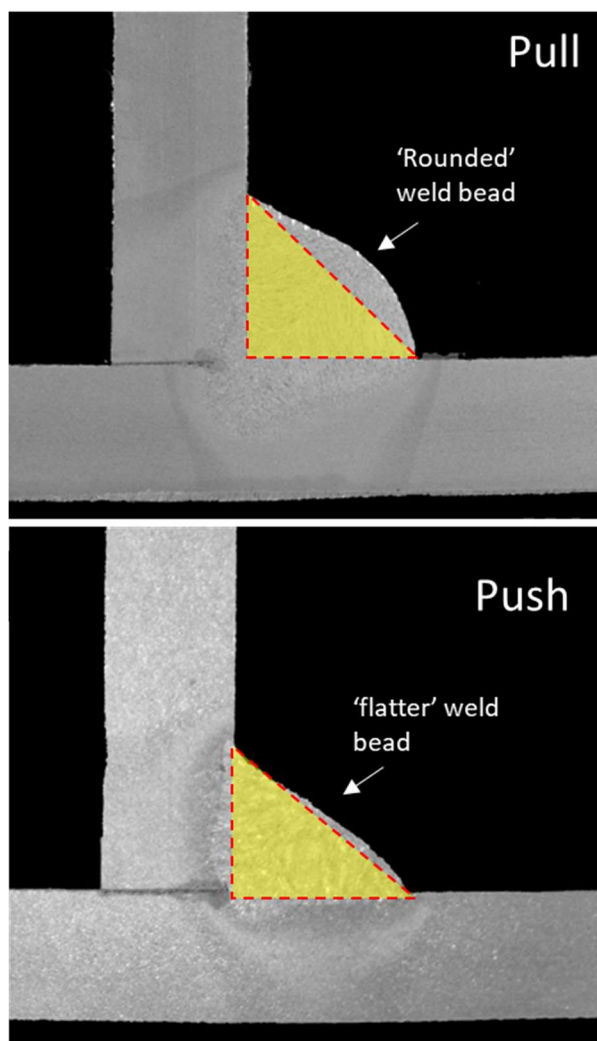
Macrograph images showing pull and push fillet welds.
